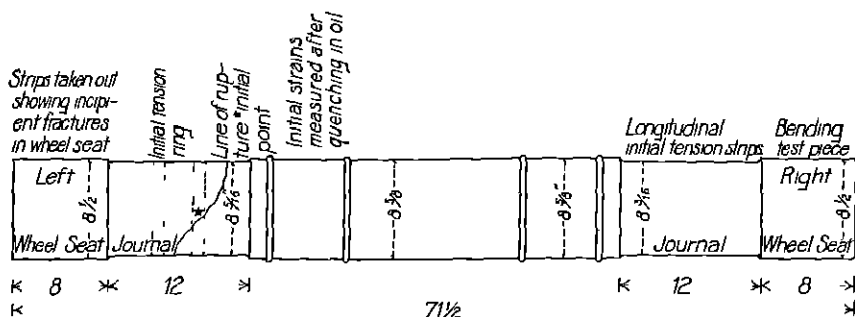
Sketch of main driving axle which failed under engine No 1056 showing location of fracture in left hand journal with descriptive notes concerning tests and positions of test pieces
